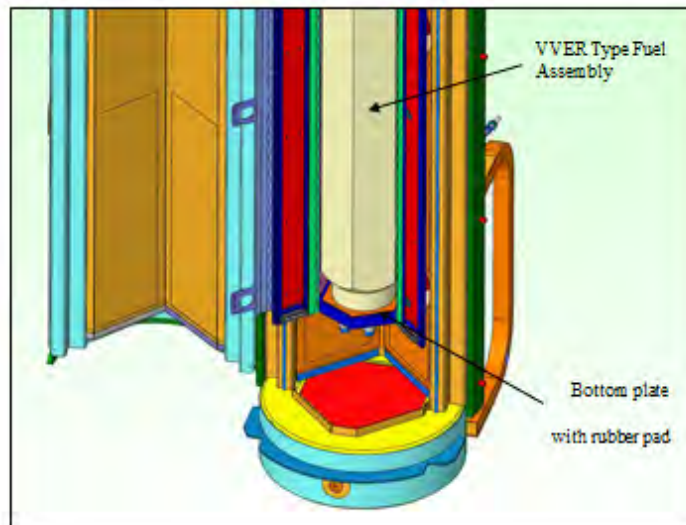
VVER Fuel Assembly Installed - Bottom Nozzle Region
